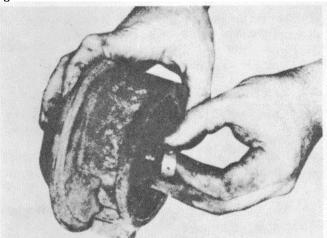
L-18. Removing the Bearing and Washer (Compressor End)
